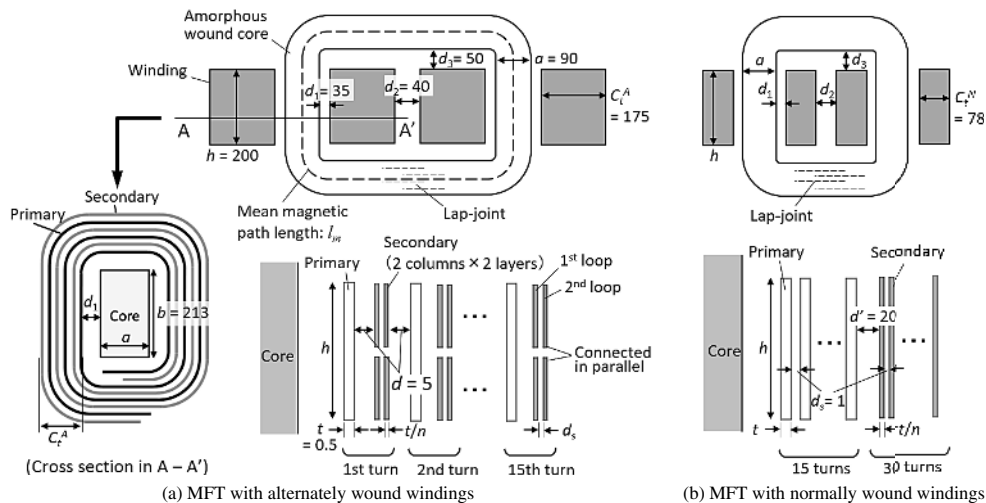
Cross-sectional dimension views of overall and winding's sheet arrangements of the prototype 500 kVA MFTs (Unit: mm)
